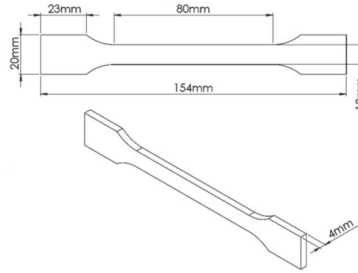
ISO 527-2:2012 dogbone test specimen dimensions [34]
